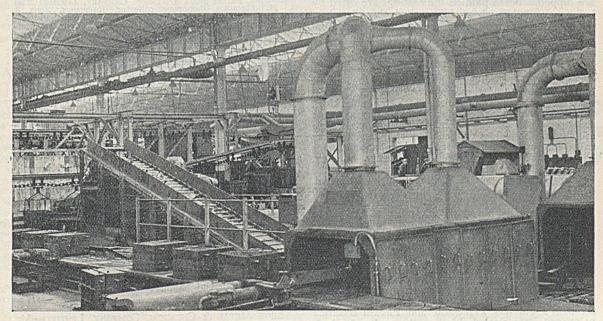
View of Mould Pushers, Knock-out, and Ventilation Arrangements on the Chair Plant at B. R. Horwich Foundry.
